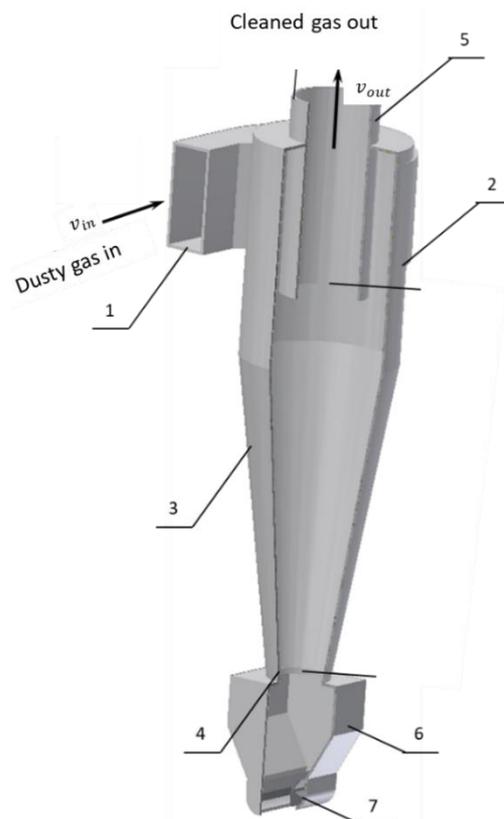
Parts of the dust separator cyclone (1. Gas inlet stub, 2. Cylindrical part, 3. Conical part, 4. Dust outlet, 5. Gas outlet/vortex detector tube, 6. Dust container, 7. Rotary valve)
